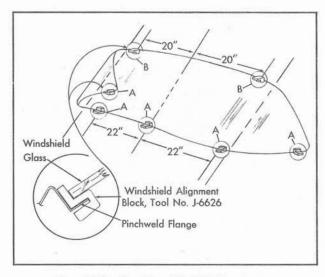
Checking Windshield Glass to Pinchweld Alignment
